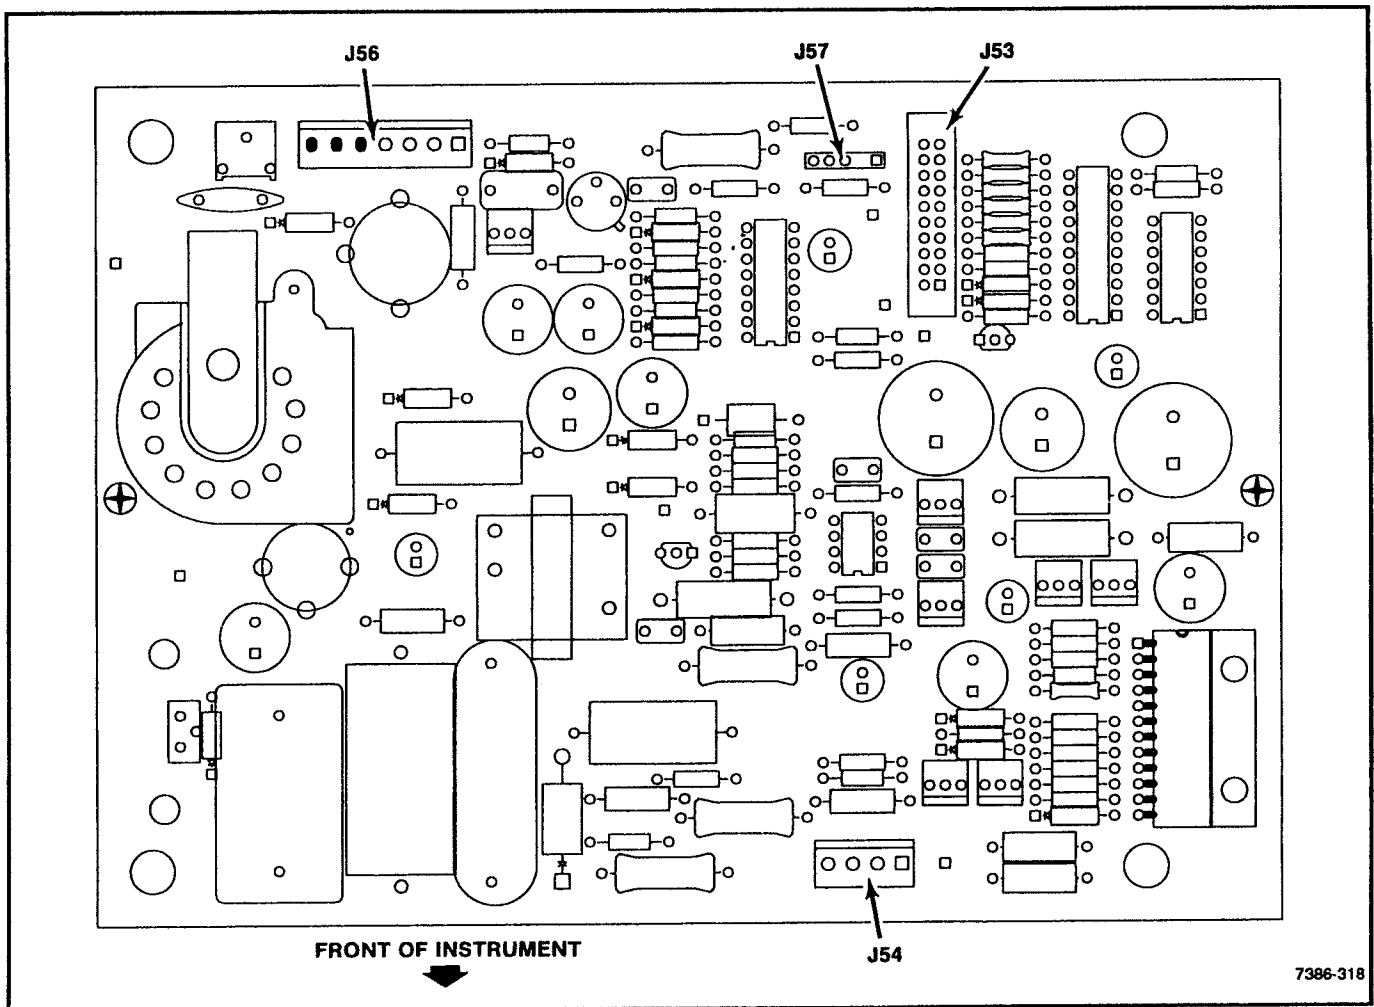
Connector locations for removal of the A8 CRT Driver board.
